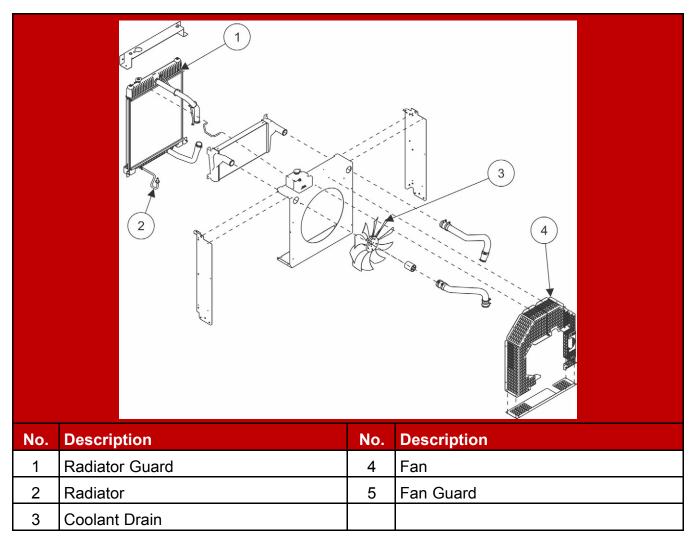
COOLING SYSTEM FOR GENERATOR SET WITH QSJ5.9G ENGINE
